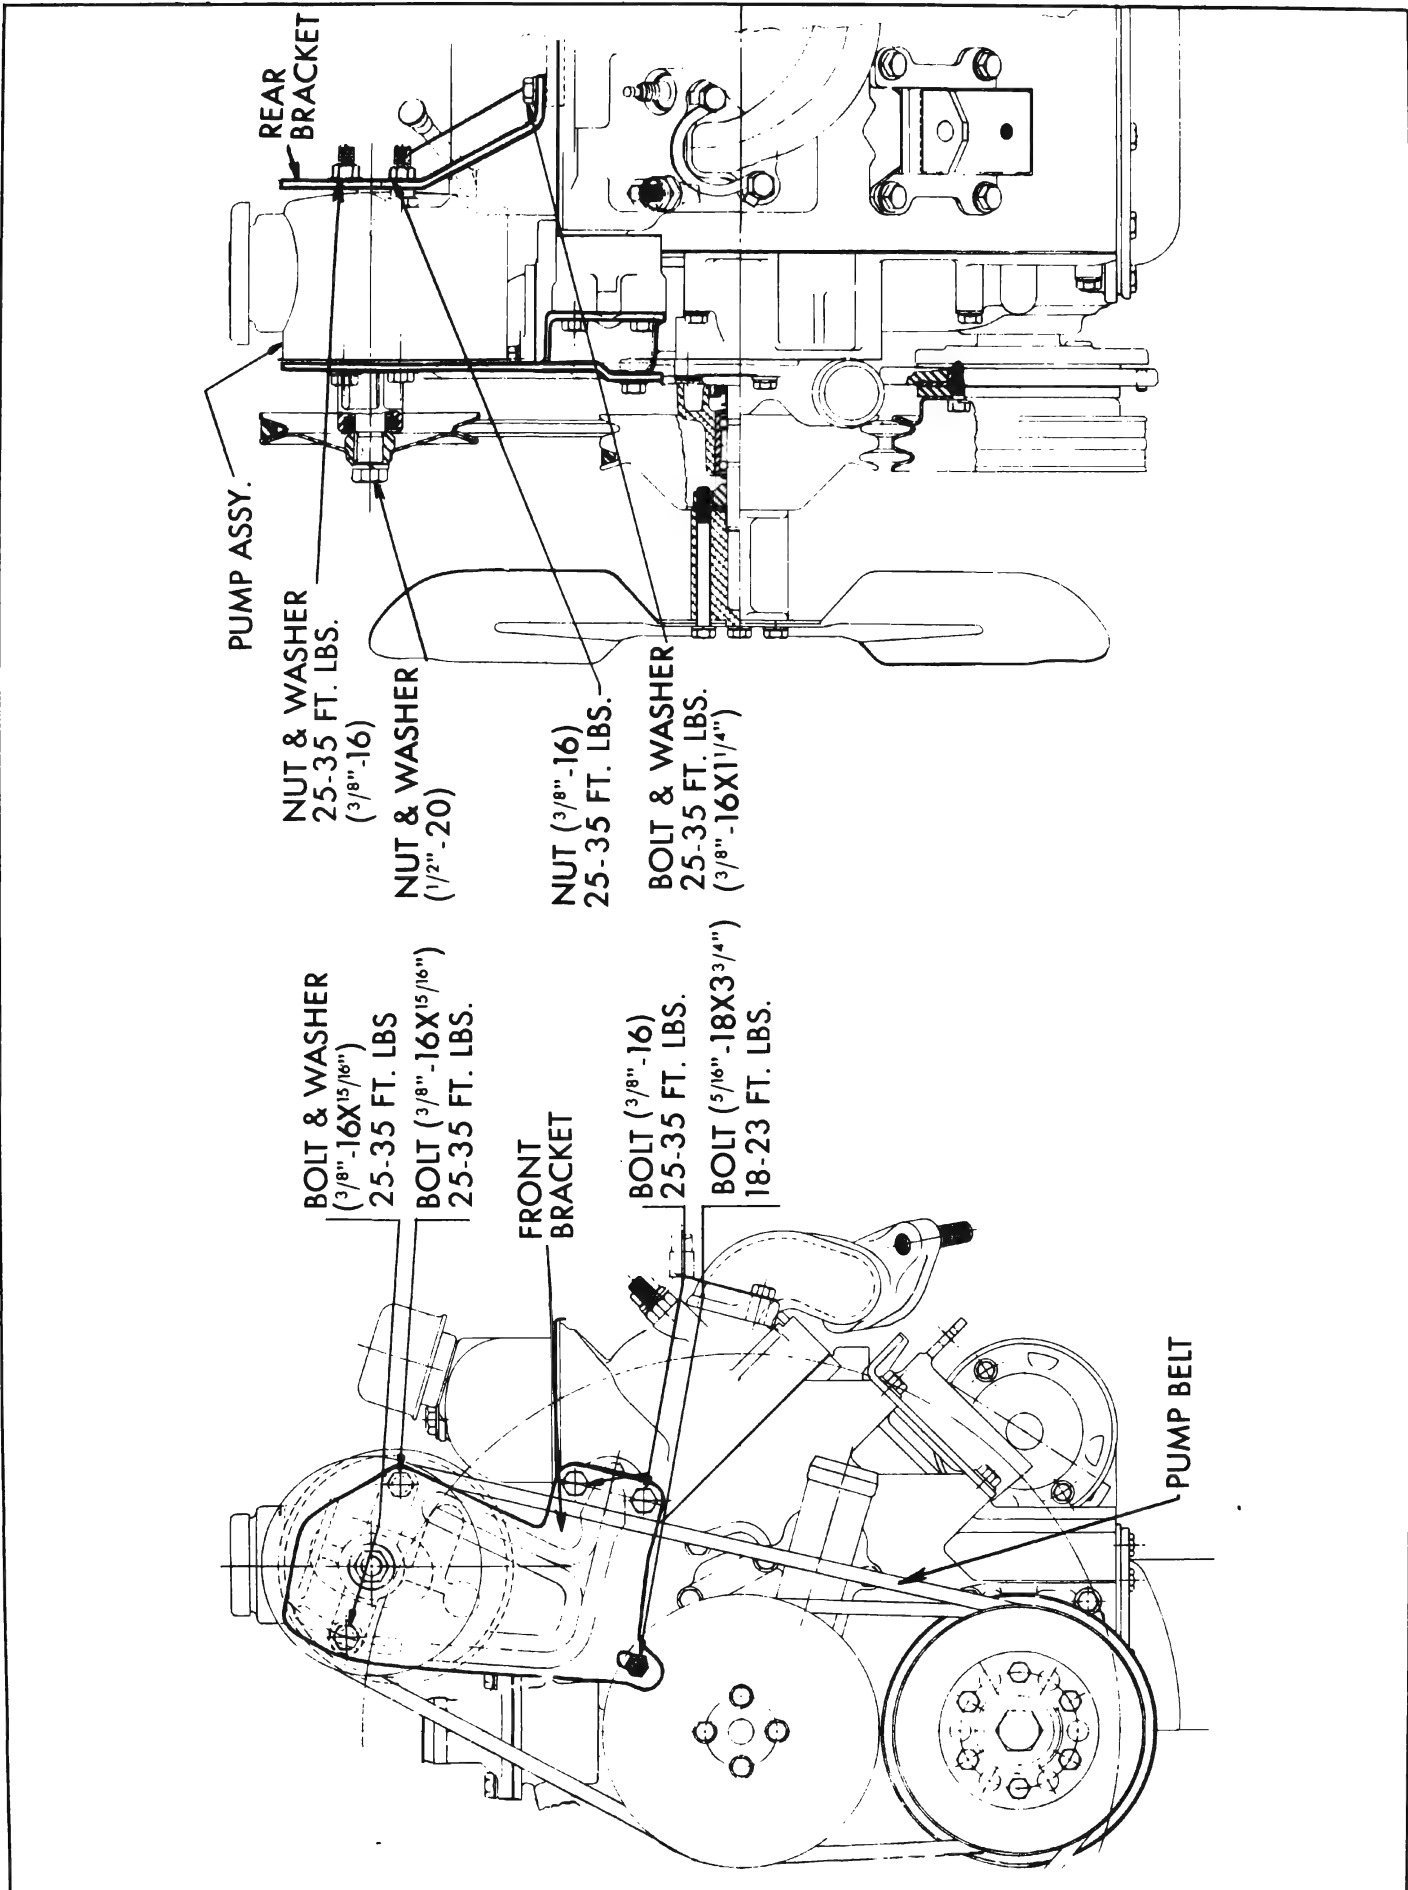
Power Steering Pump Installation - 4400-4600-4800 Series
